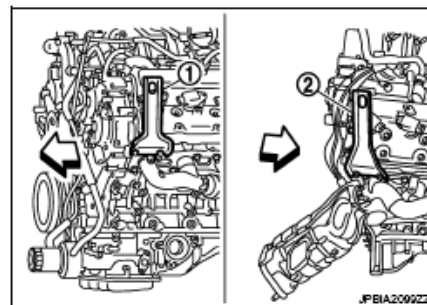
Identifying Cylinder Head (Bank 1) And Cylinder Head (Bank 2)
